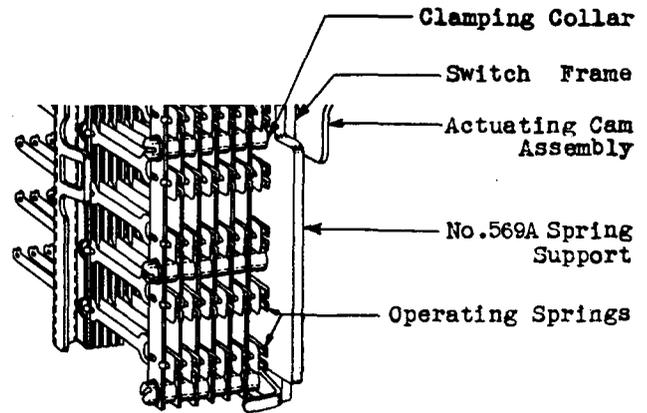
Position of Spring Support when Removing and Replacing Actuating Plate
